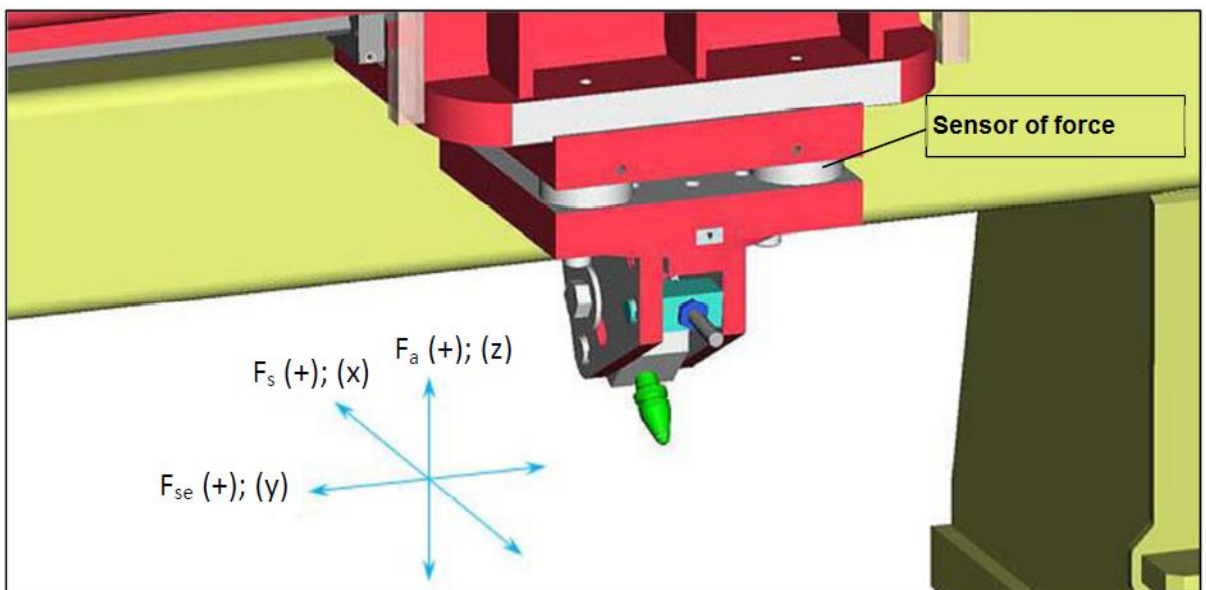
10: Definition of force components, axes position and sensors on the cutting head on the special planer HSX 1000-50 [29]
